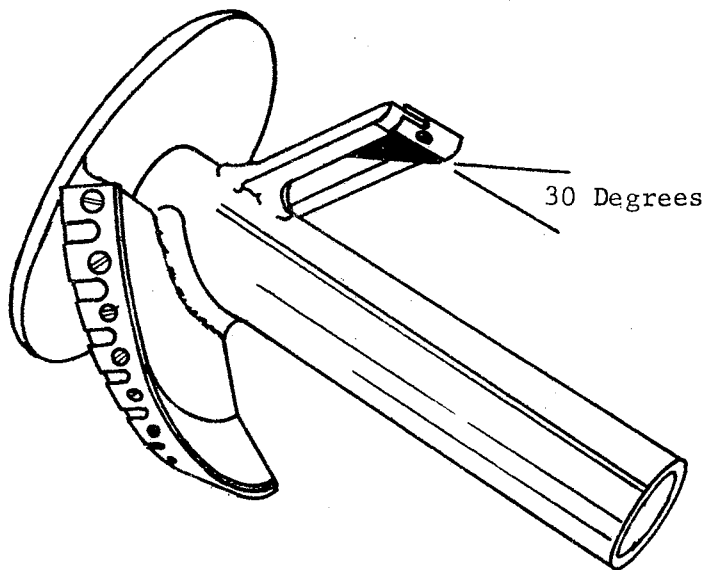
Drawing of One-Half of a Cutter Showing the Ledge Attached to the Base Disk and the 30 Degree Bevel Angle
